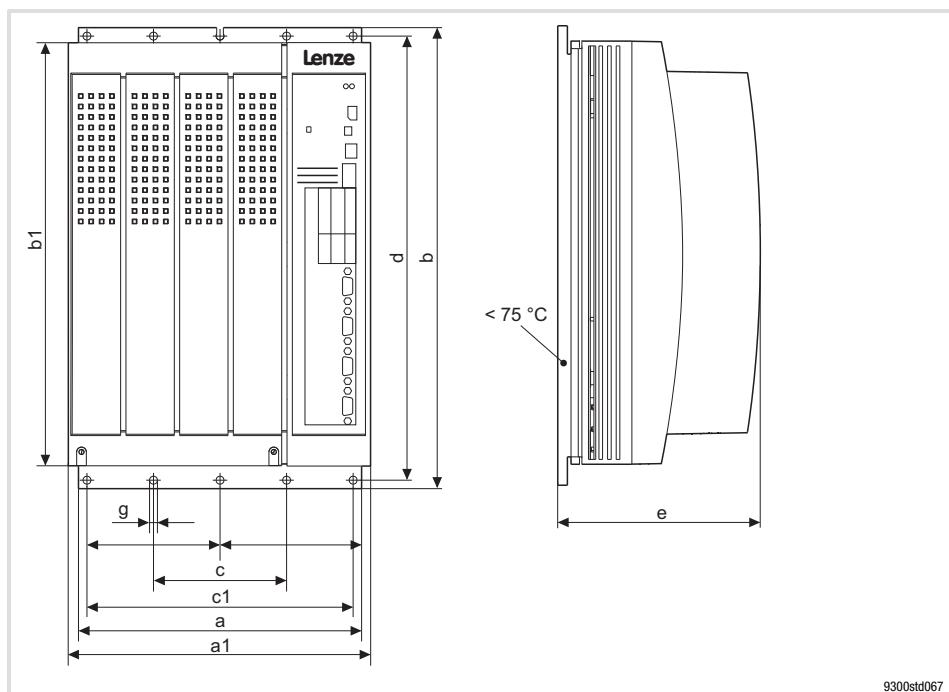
Dimensions for mounting in "cold plate" technique 15 ... 22 kW
